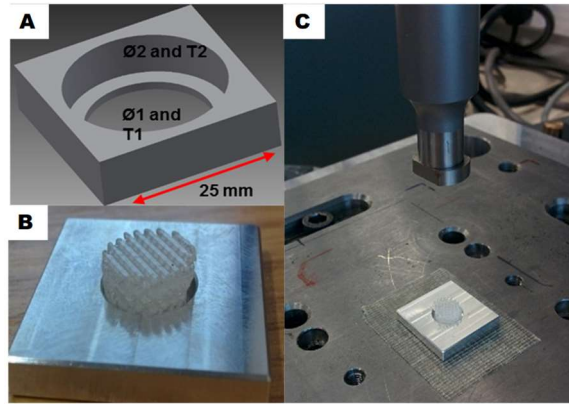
10. Ultrasonic welding set-up used in this study: A. CAD model of designed fixture and B. fabricated fixture with PLA and AW and C. final welding set-up.
